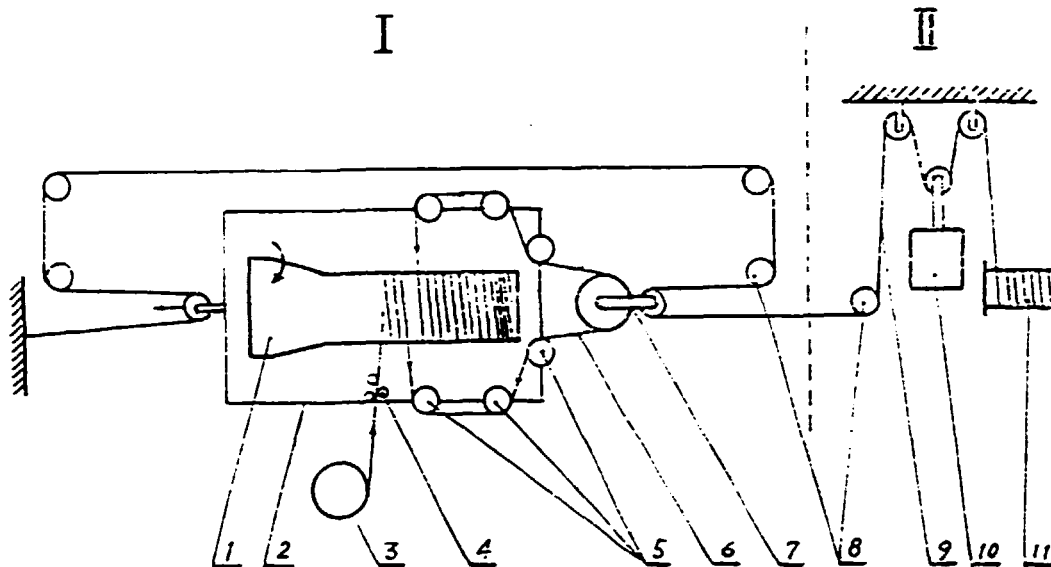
Sketch Illustrating the Working Principle of Weight-balanced Tension Type Wire-winding Machine
